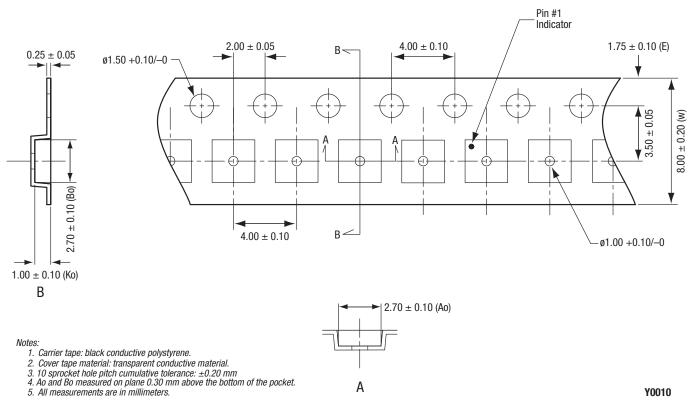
SKY13442-553LF Tape and Reel Dimensions
